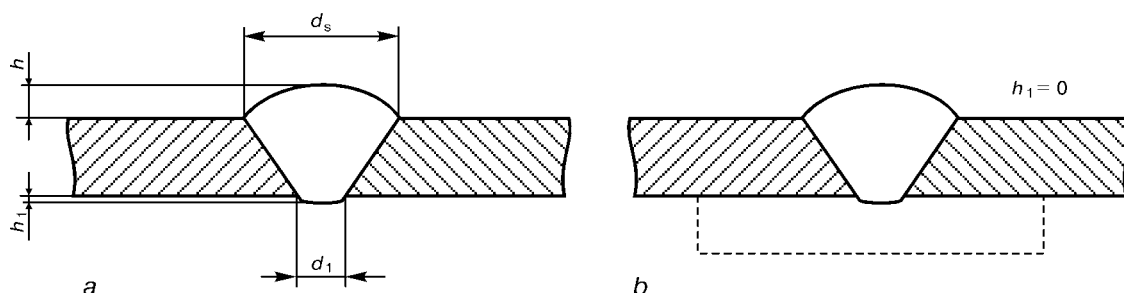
Main parameters of a welded spot in welding without backings (*a*) and on a removable backing (*b*)
